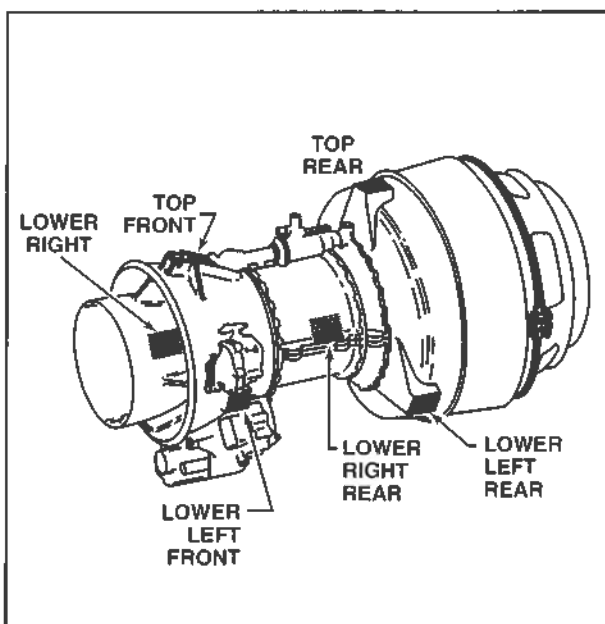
Turboshaft engines experience high torque loads and require stronger engine mounts.
